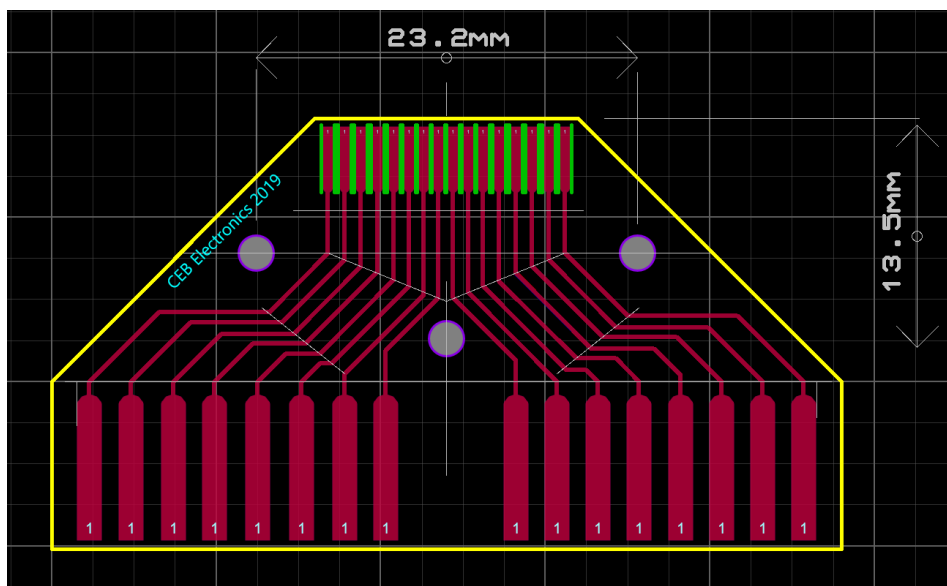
Schematic diagram of the PCB design. Design was the same for both the top side and the bottom side.
